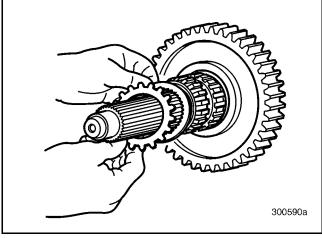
Removing Third Speed Gear External- and Internal-Toothed Thrust Washers
